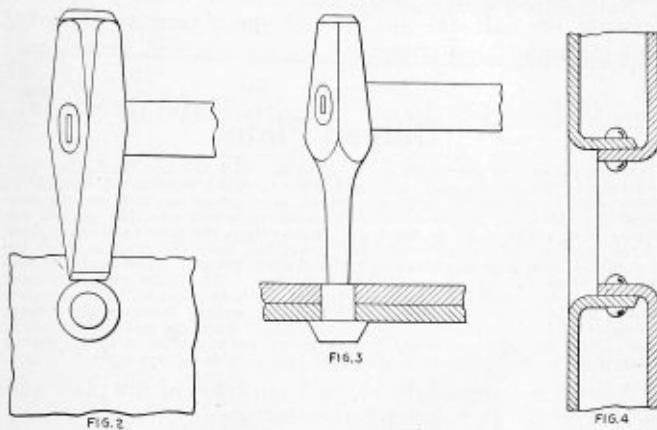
Removing Rivet Heads. Fig. 3.—Backing Out Rivets. Fig. 4.—Flanged Door Hole
